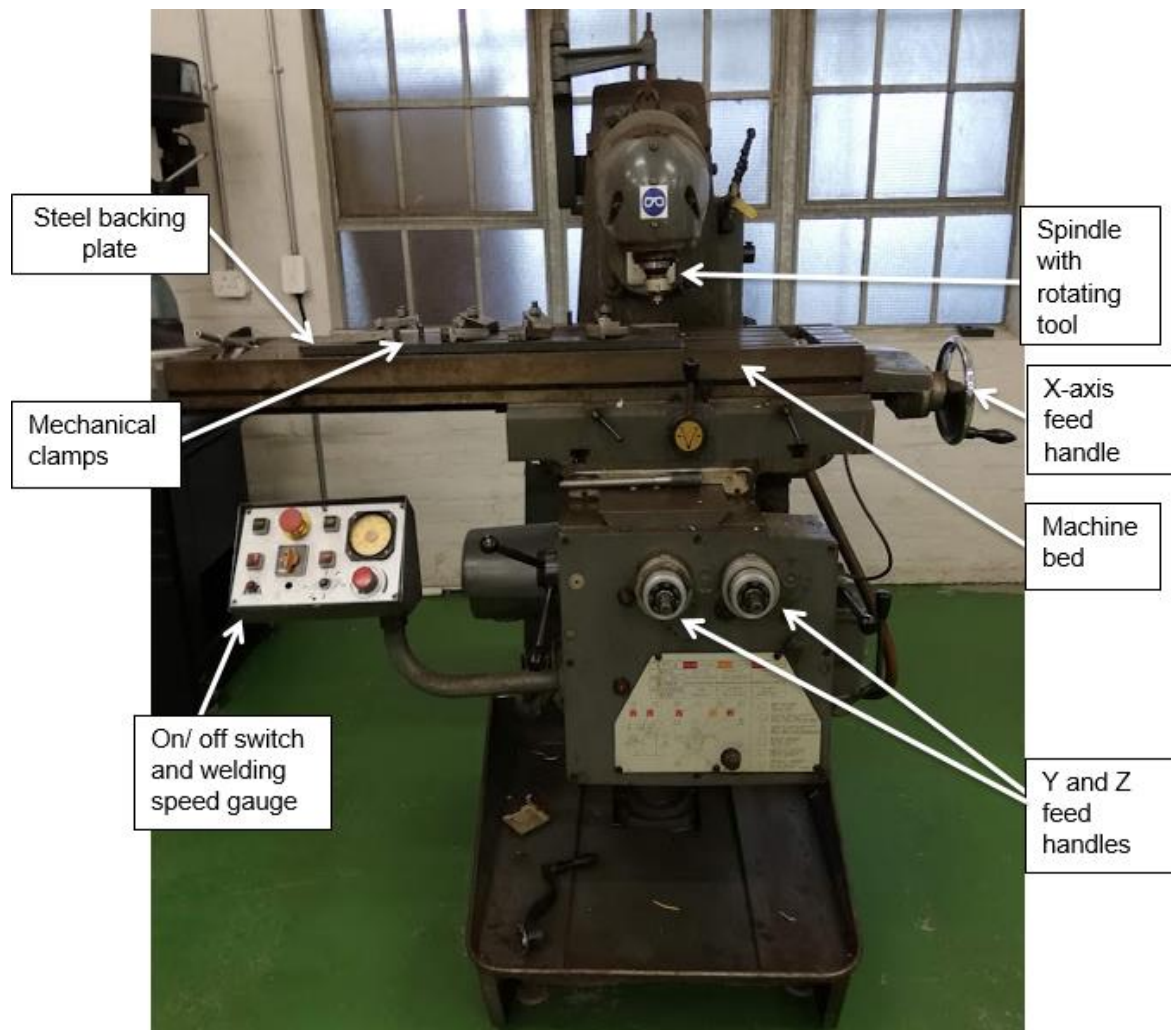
Shows the friction Stir Welding Machine used for welding
